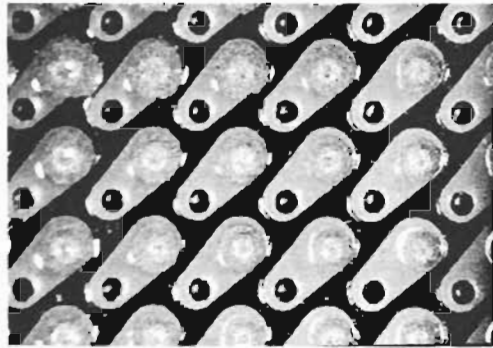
Paste slump on BGA teardrop pads (EPS)
